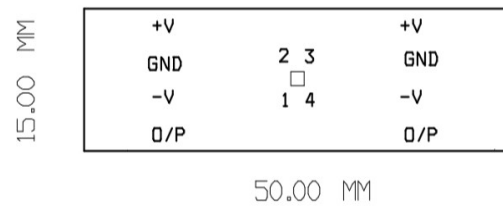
Basic layout of Hall sensor mounted on PCB
